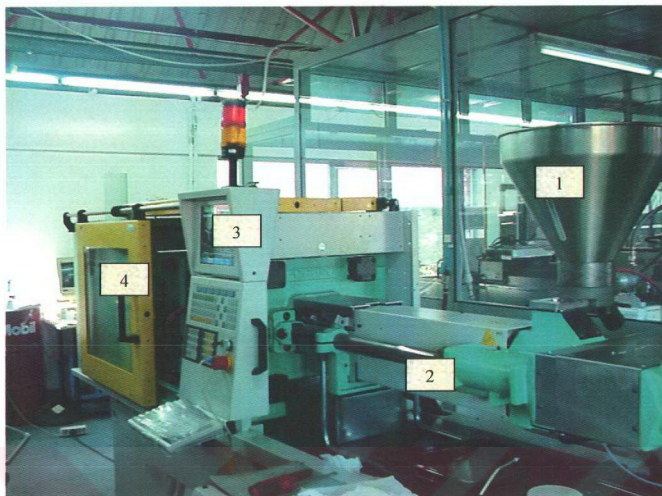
Arburg Allrounder 320C injection molding machine, 1)-hopper, 2)-heating cylinder, 3)-control panel, 4)-molding section
